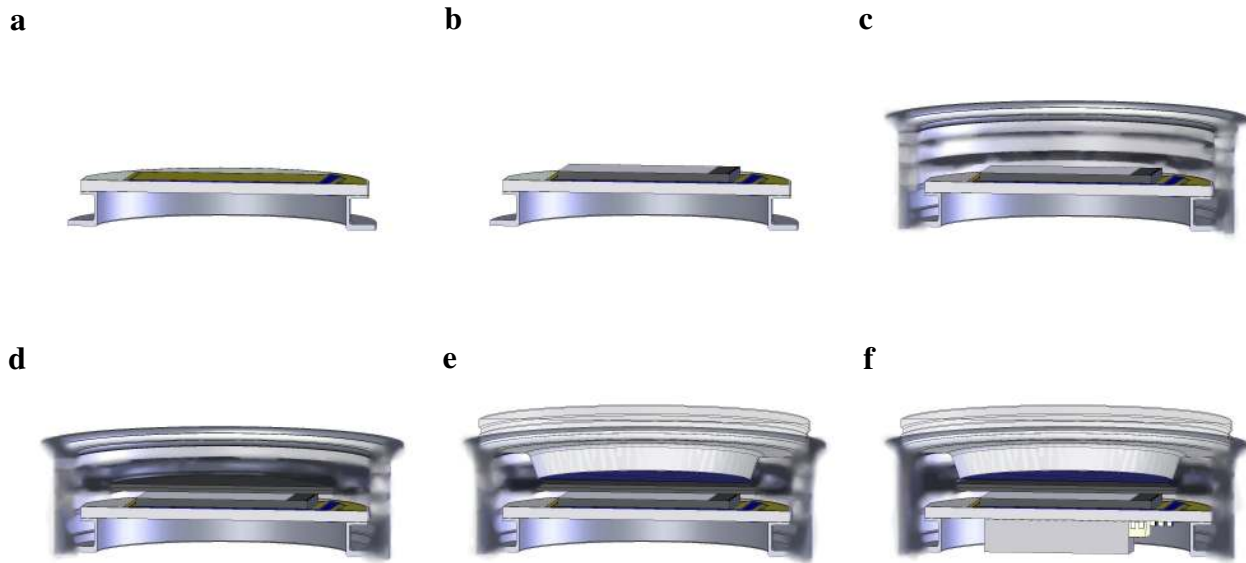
Cross-sectional views of the optical image tube fabrication process. (a) The ceramic header is active brazed to a kovar adapter flange. (b) A Medipix2 chip is die bonded and wirebonded to the header assembly. Electrical testing of the Medipix2 is performed via a serial interface board. (c) This assembly is laser welded to the back flange of the vacuum tube brazed body. (d) The MCPs are installed in the tube, the tube is placed in an ultrahigh vacuum processing chamber and prepared for sealing. (e) The photocathode is activated and the tube is sealed and can be removed from the vacuum processing chamber. (f) Finally the passive components (connectors and capacitors) are bonded to the exterior surface of the ceramic header.
